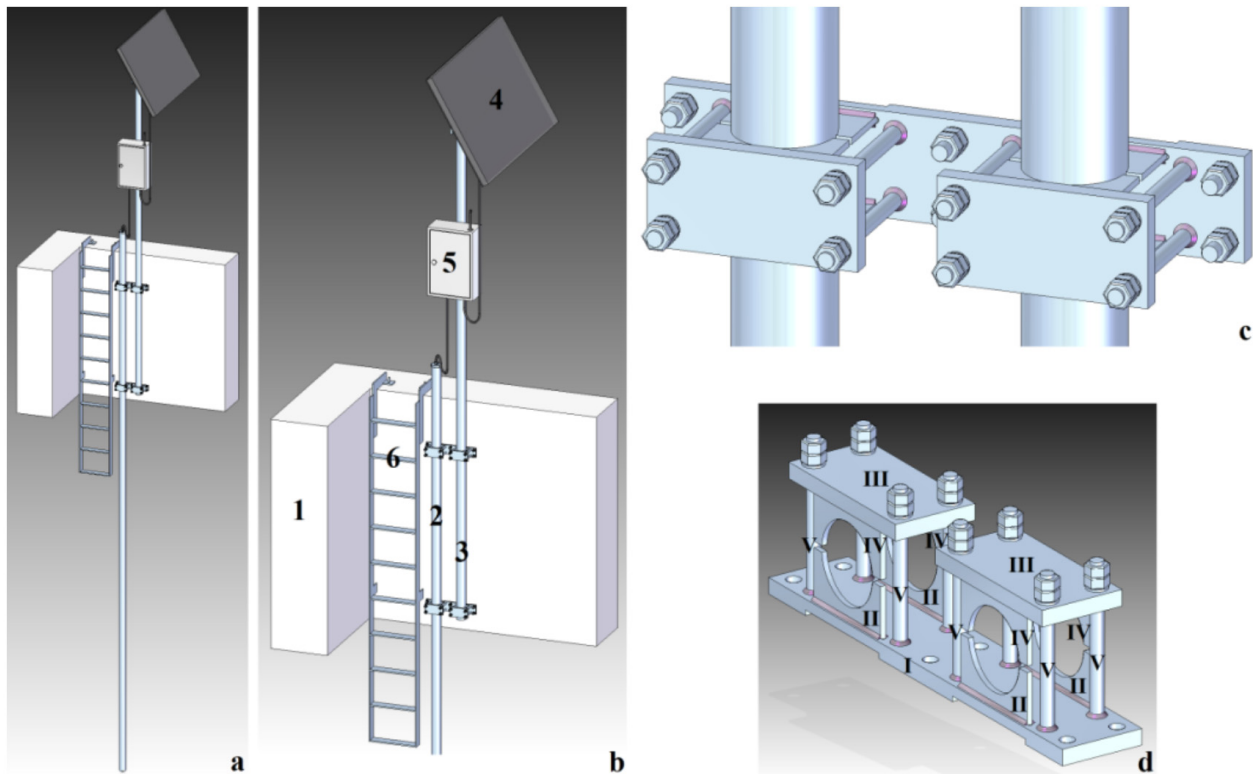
a) 3D assembly models of the tide gauge station; b) detail of the emerged part; c) detail of the mechanical constraint system; d) numbering of the constraint system.
